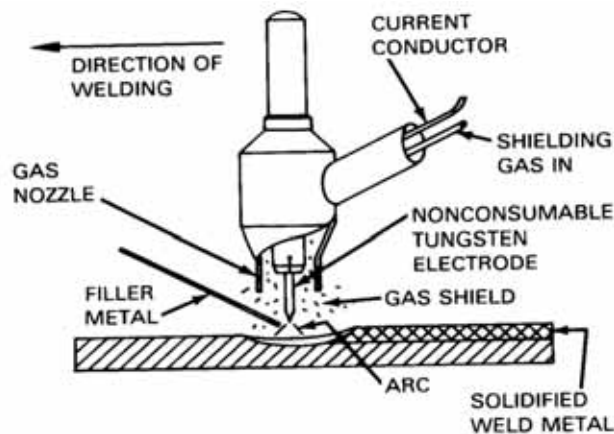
, Schematic picture of tungsten inert gas arc welding [16]
